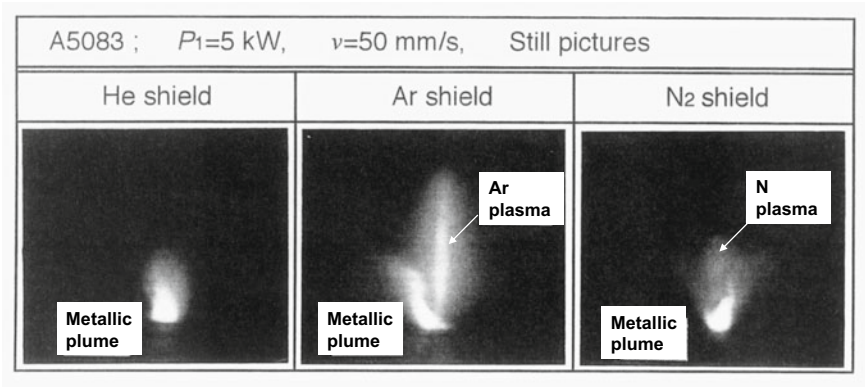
High-speed video pictures of induced plume and gas plasma during CO₂ laser welding in He, N₂, and Ar coaxial shielding gas
